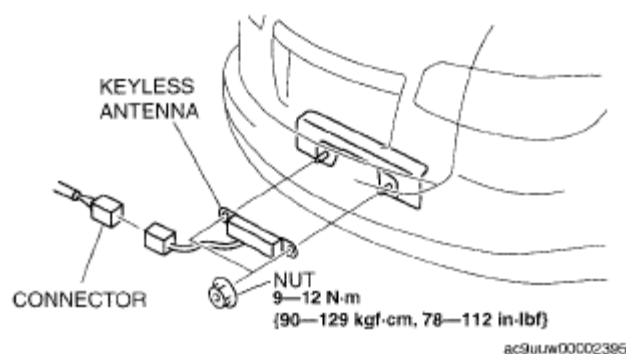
Identifying Keyless Antenna, Connector With Screw & Torque Specifications (Exterior, Rear)
